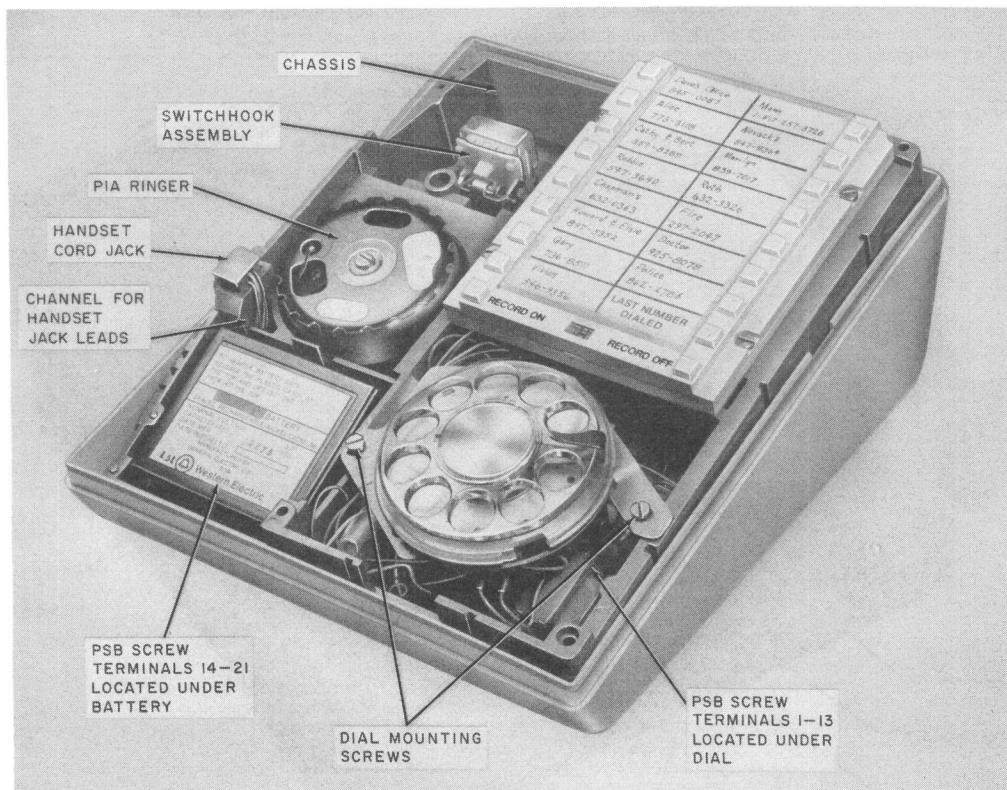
960A01M (MD) Telephone Set With Handset, Faceplate, Shield, and Upper Housing Removed
